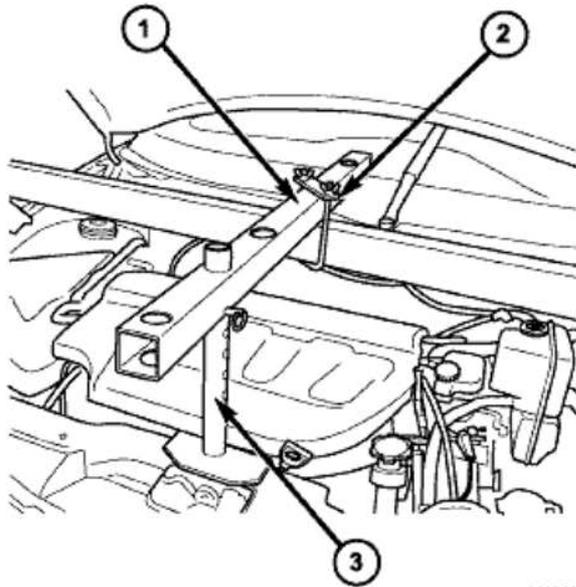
Identifying Support Tube & Sleeve/Bracket
